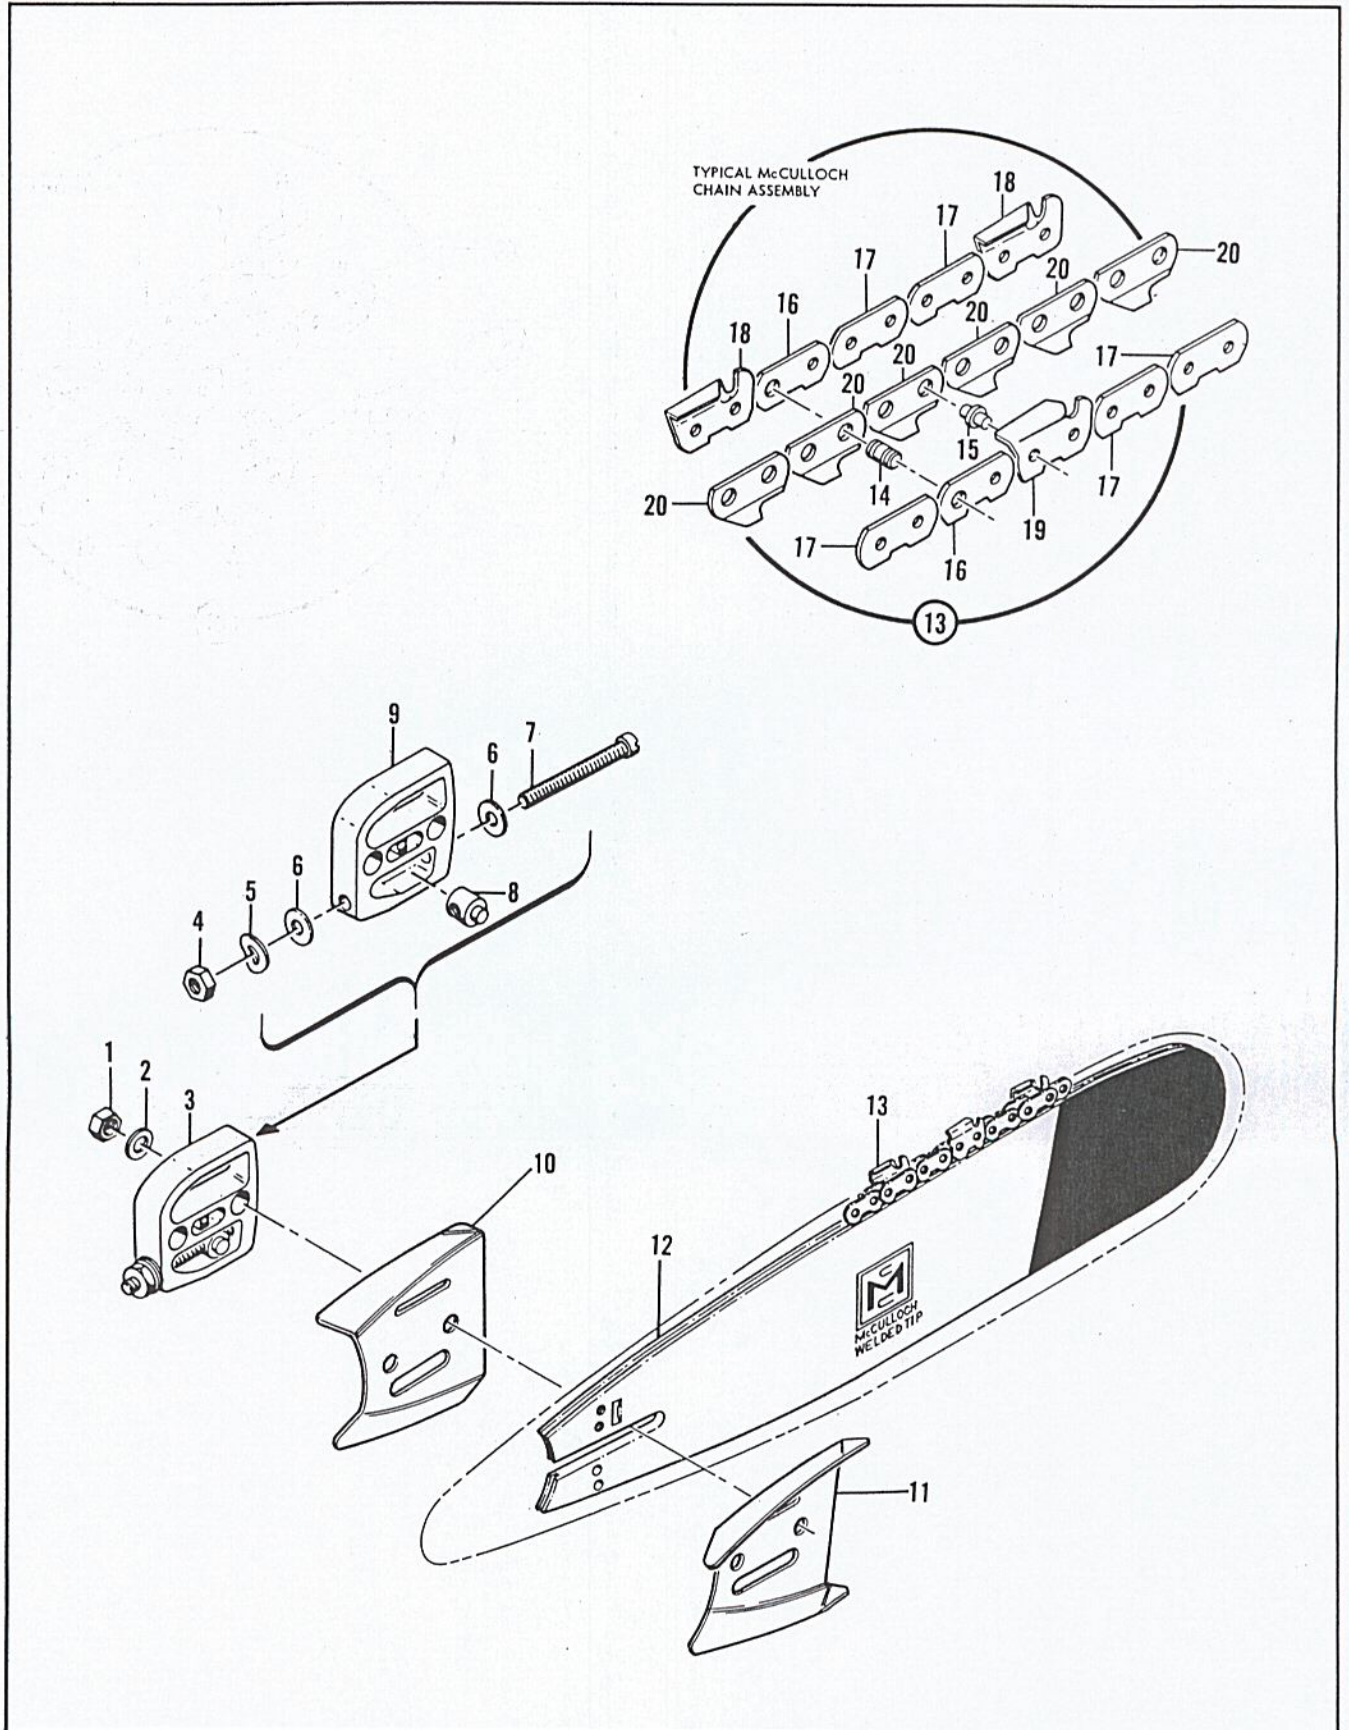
Lockplate Adjusting Assembly, Bar and Chain
